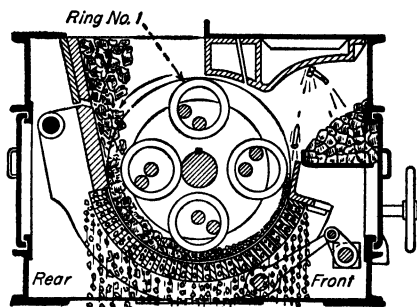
Ring-type hammer mill. At ring No. 1, the ring takes a radial position on shaft A. At the next counter-clockwise ring the feed displaces the ring and shaft B supports and rotationally pushes the ring. Because of the radial displacement, the ring is centrifugally "off-balance," which causes the ring to press hard on the oncoming feed. (Pennsylvania Crusher Co.)
